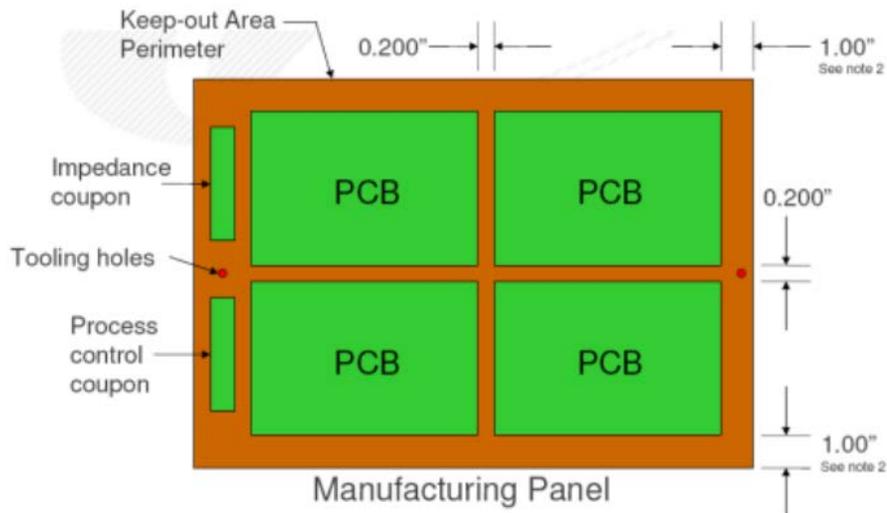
Impedance test coupons examples for a PCB panel. From [FineLine-17].
